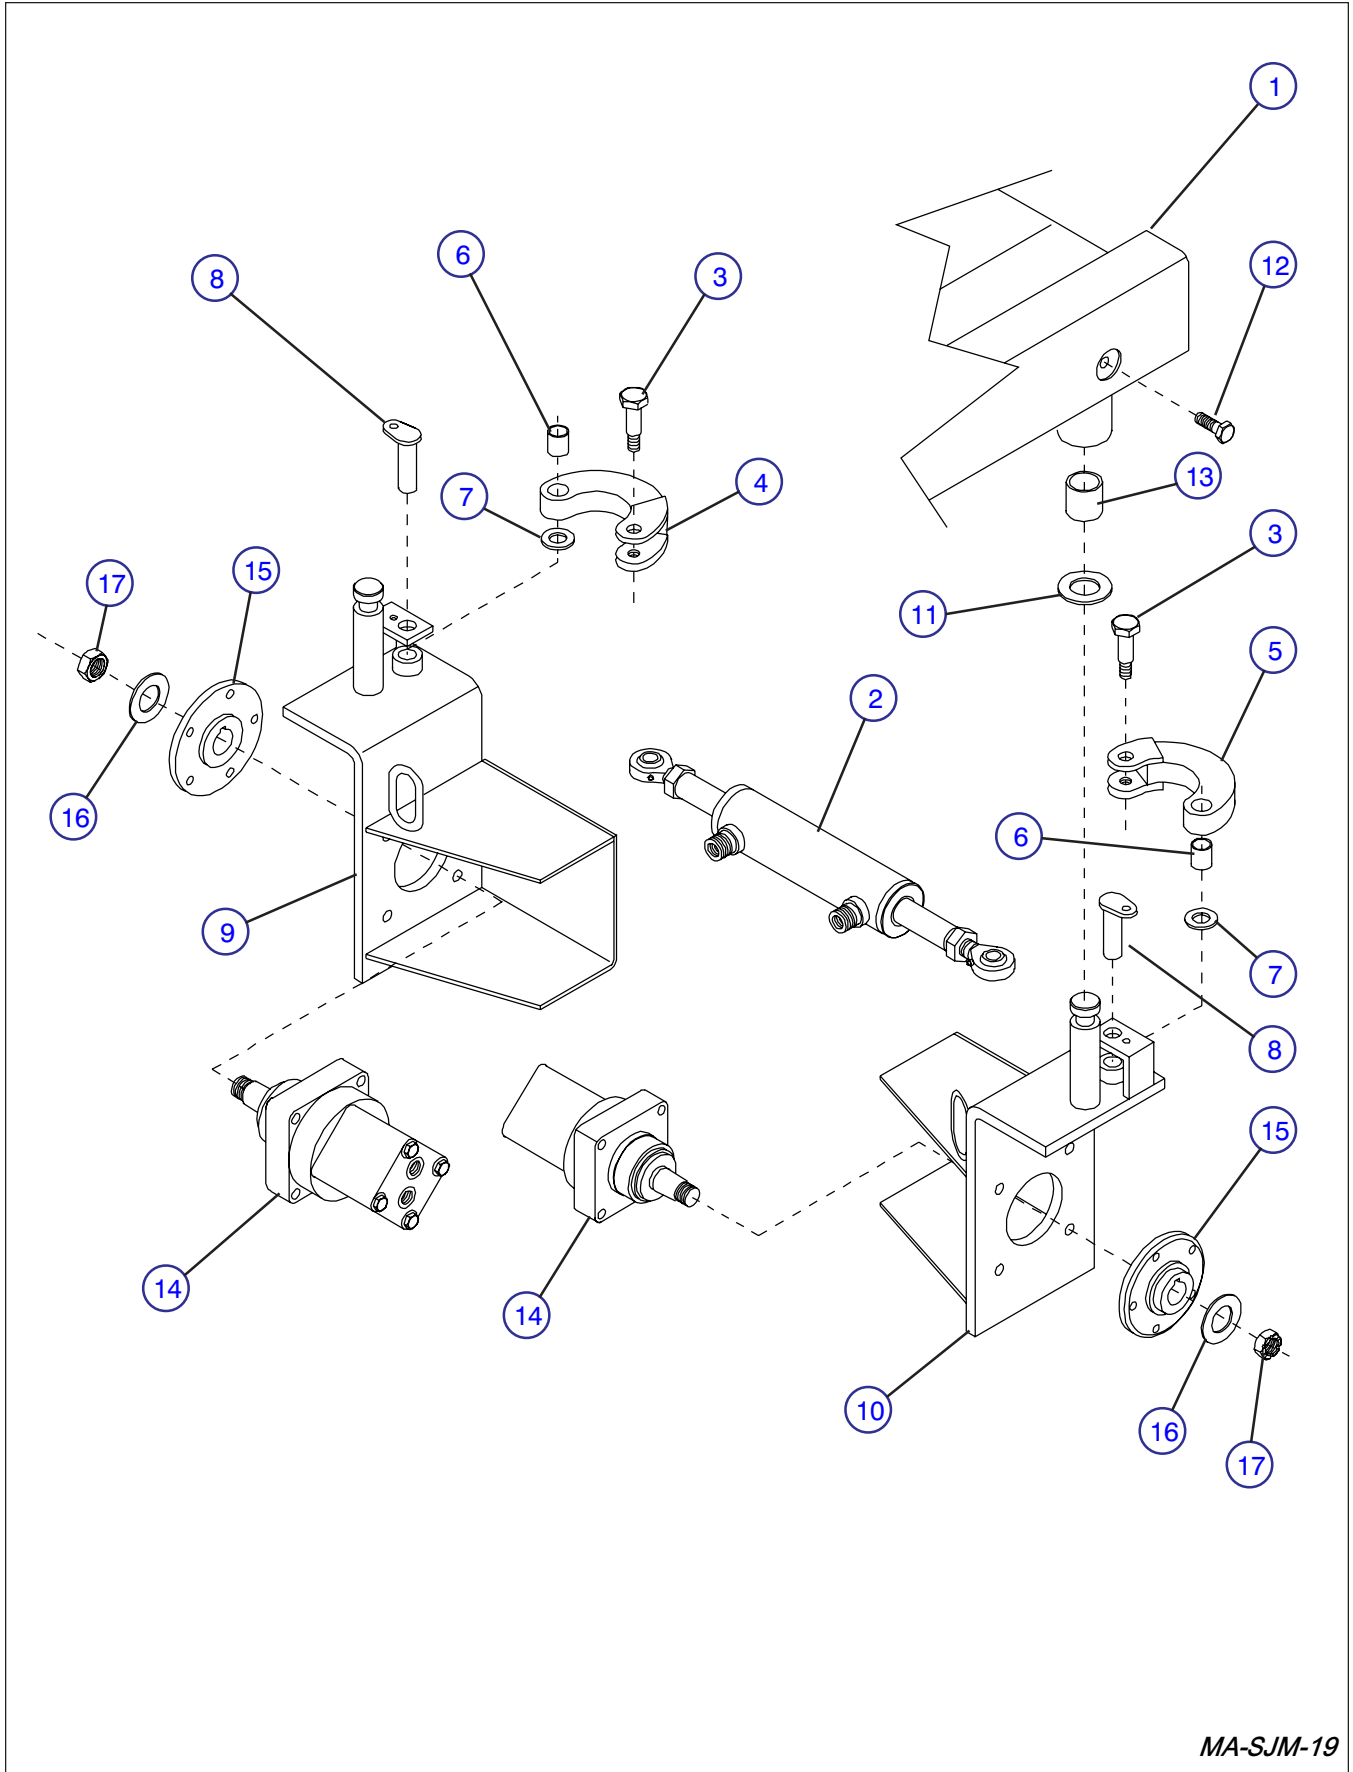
STEER CYLINDER ASSEMBLY
